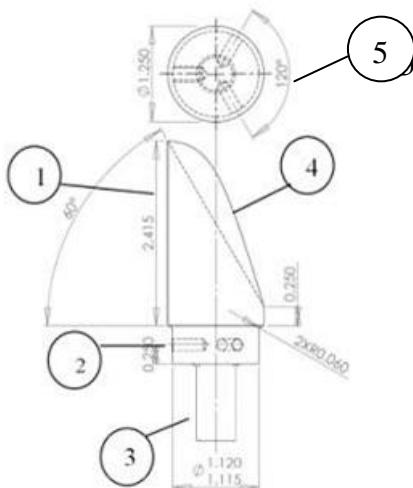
The Top and Front Views of the Drawing of the Connecting Shaft
